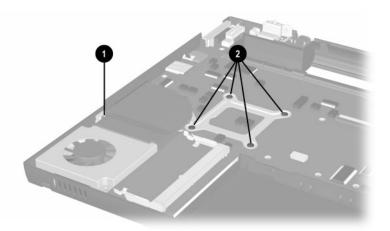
Identifying the Processor Mounting Bracket and Fan Screws
